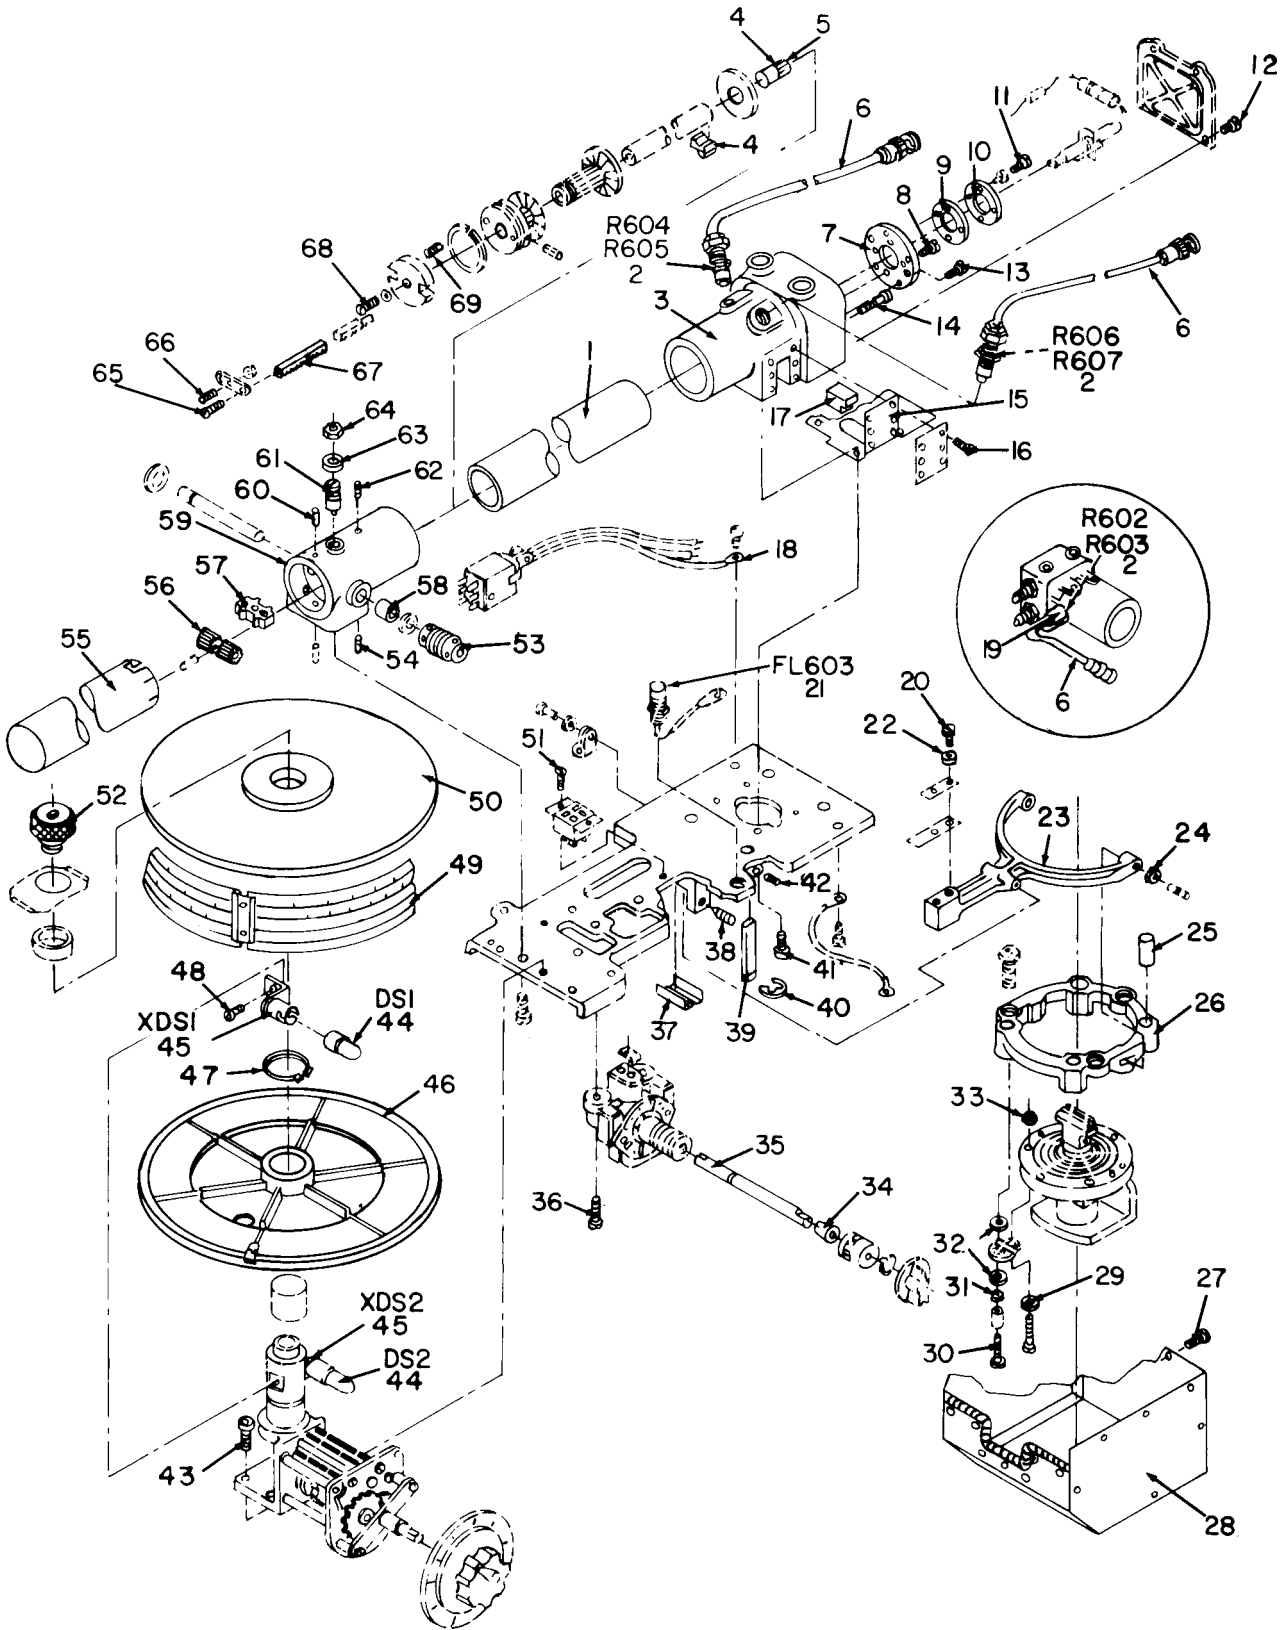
Sweep Oscillator, Frequency MegaHertz Control Gear Assembly.
